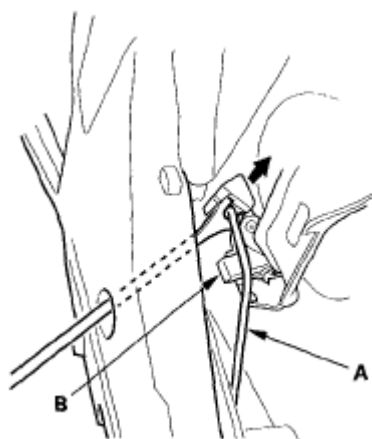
Identifying Outer Handle Rod From Outer Handle
